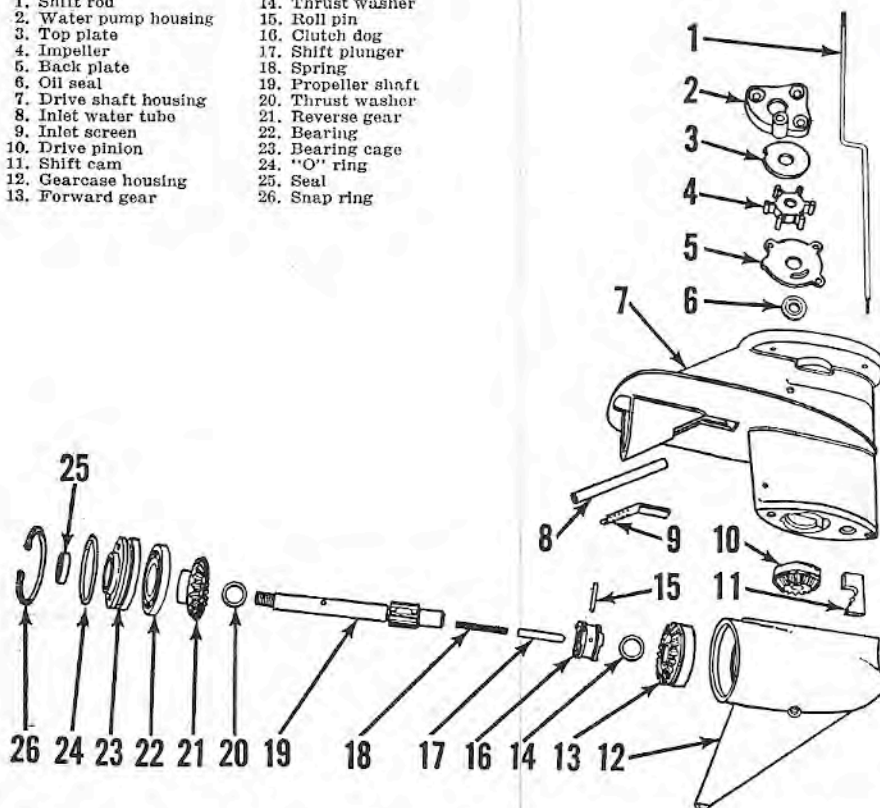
Exploded view of lower unit gearcase, drive shaft housing and associated parts.
